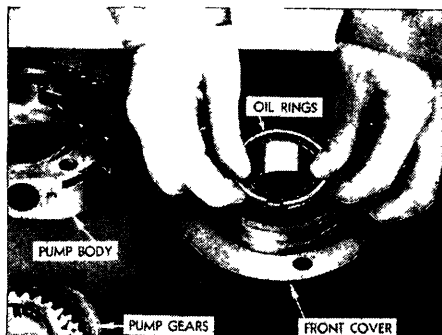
To assemble front pump and drive gear, first check new ring gap in torus cover before installing rings on pump cover—gap should be .001 to .007"
